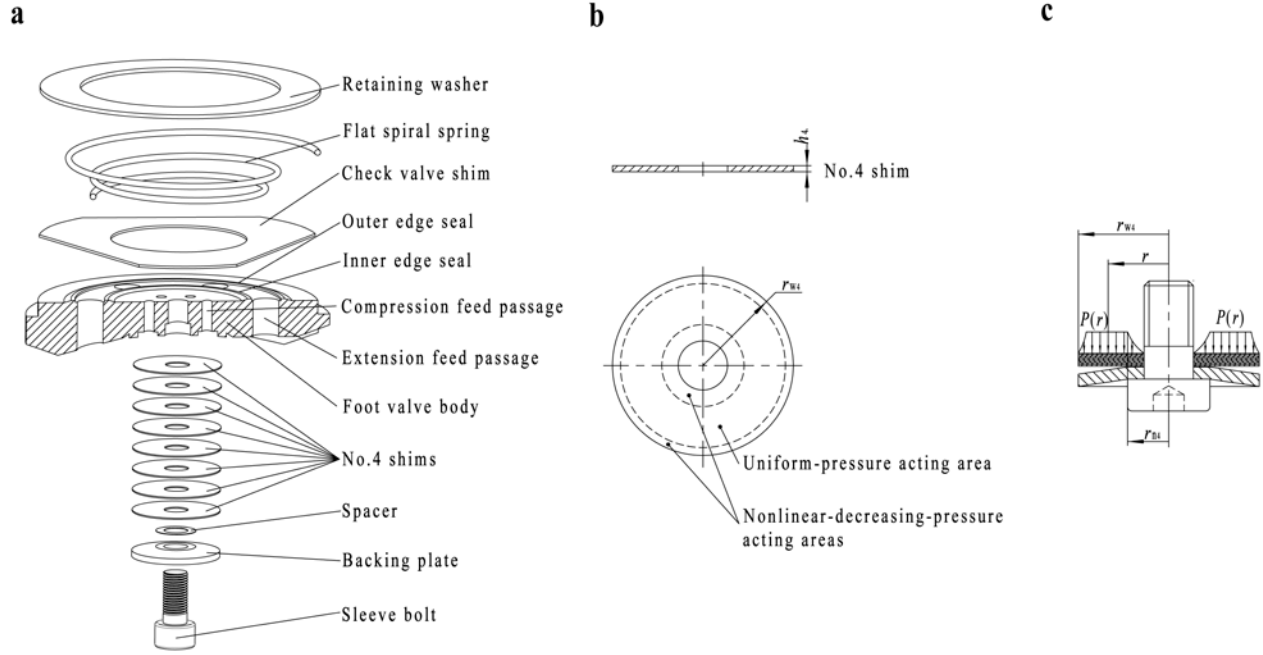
Exploded view of the foot valve assembly (a), cross-section and schematic pressure acting areas on the surface of the sealing shim (No. 4 shim) (b) and operating principle of the compression valve unit in the foot valve assembly (c).
